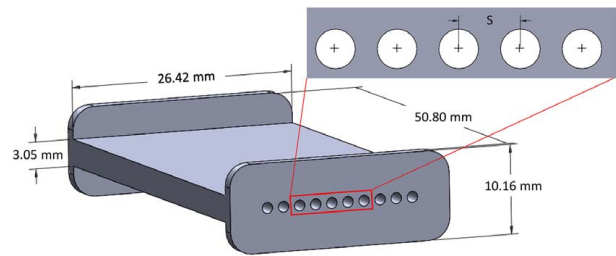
CAD schematic of overall coupon dimensions used for experimental testing
